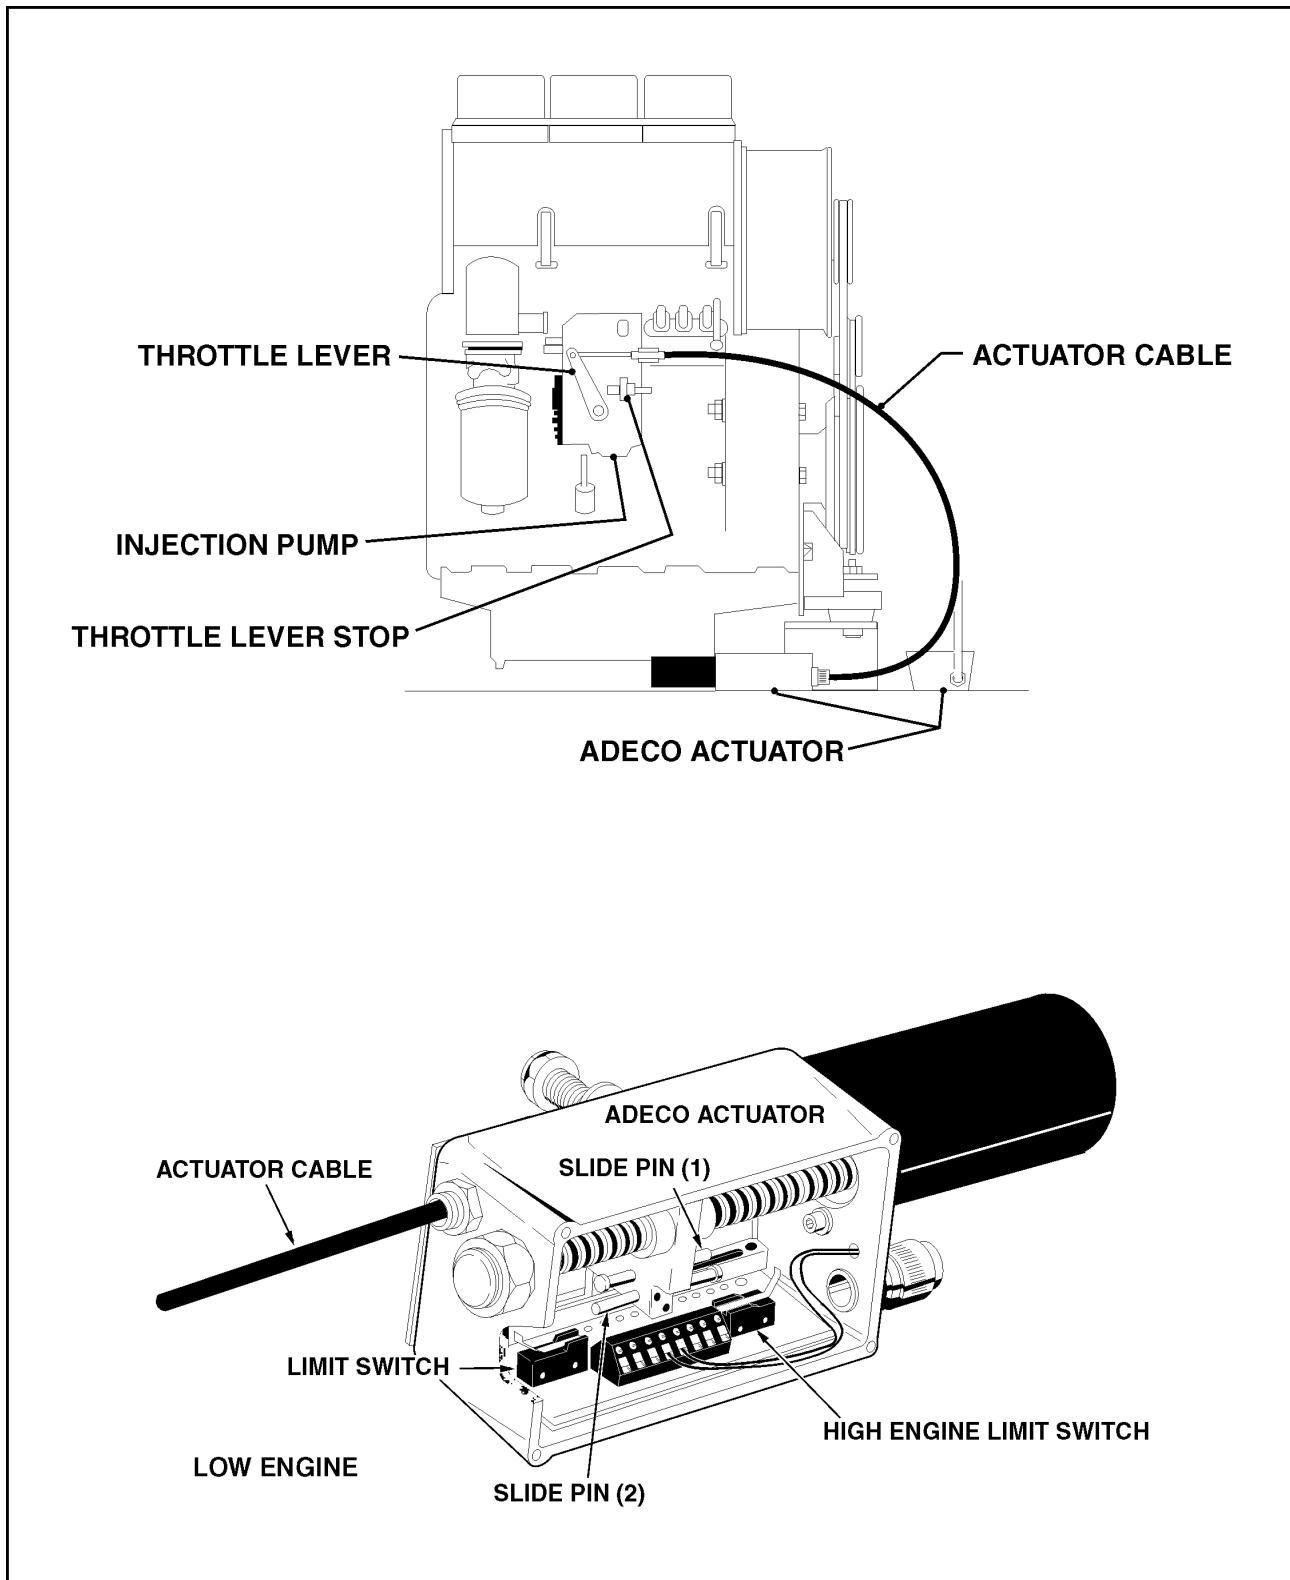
Throttle Checks and Adjustments - Deutz Engine
